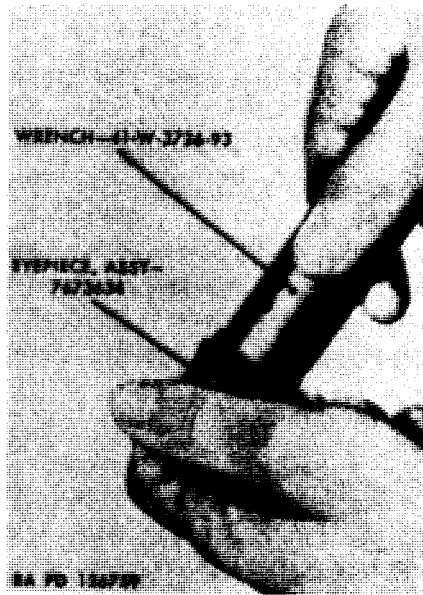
Using wrench 41-W-3726-93 to remove retaining ring of left eyepiece assembly.
